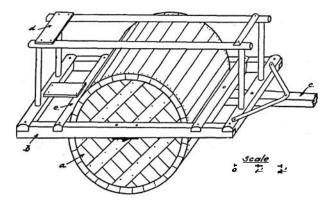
A Roller for CQmpacting Snow on a Sled Road. a. Drum, diameter 58 inches, width 96 inches, made from 2-inch plank. b. Roller frame. c. Tongue, 12 feet long. d. Driver's seat. e. Beam for scraping snow from the drum. Ontario, Canada.
